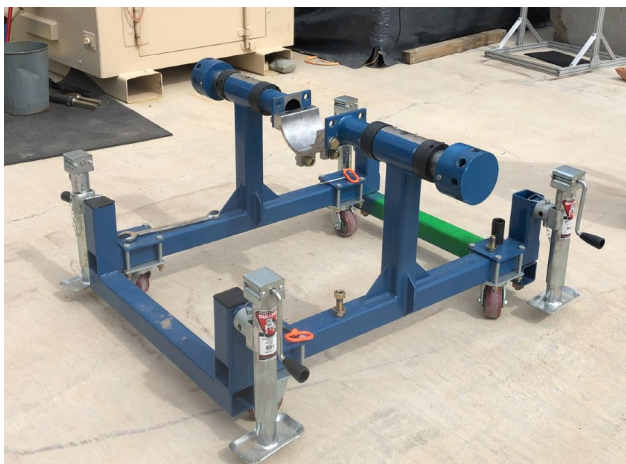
Stand with lower cradle half mounted, ready to accept tube.
